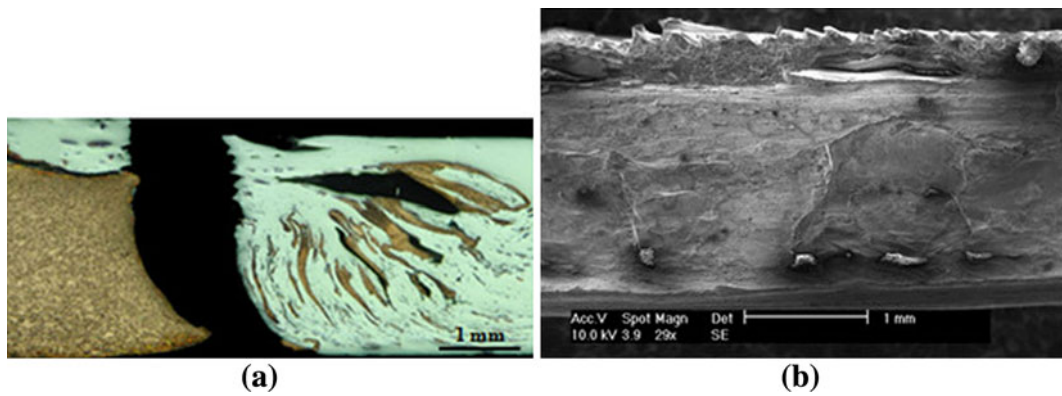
Optical macrograph of the transverse cross section (a) and SE macrograph of the fracture surface (b) of the $O_{2.5}$ weld bending specimen.
